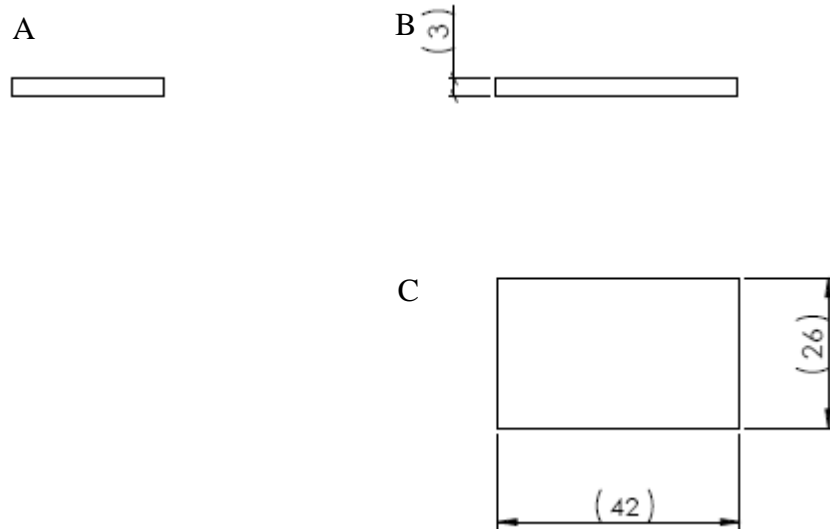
An acrylic holder drawing in mm scale, (A) top view, (B) side view and (C) front view.
